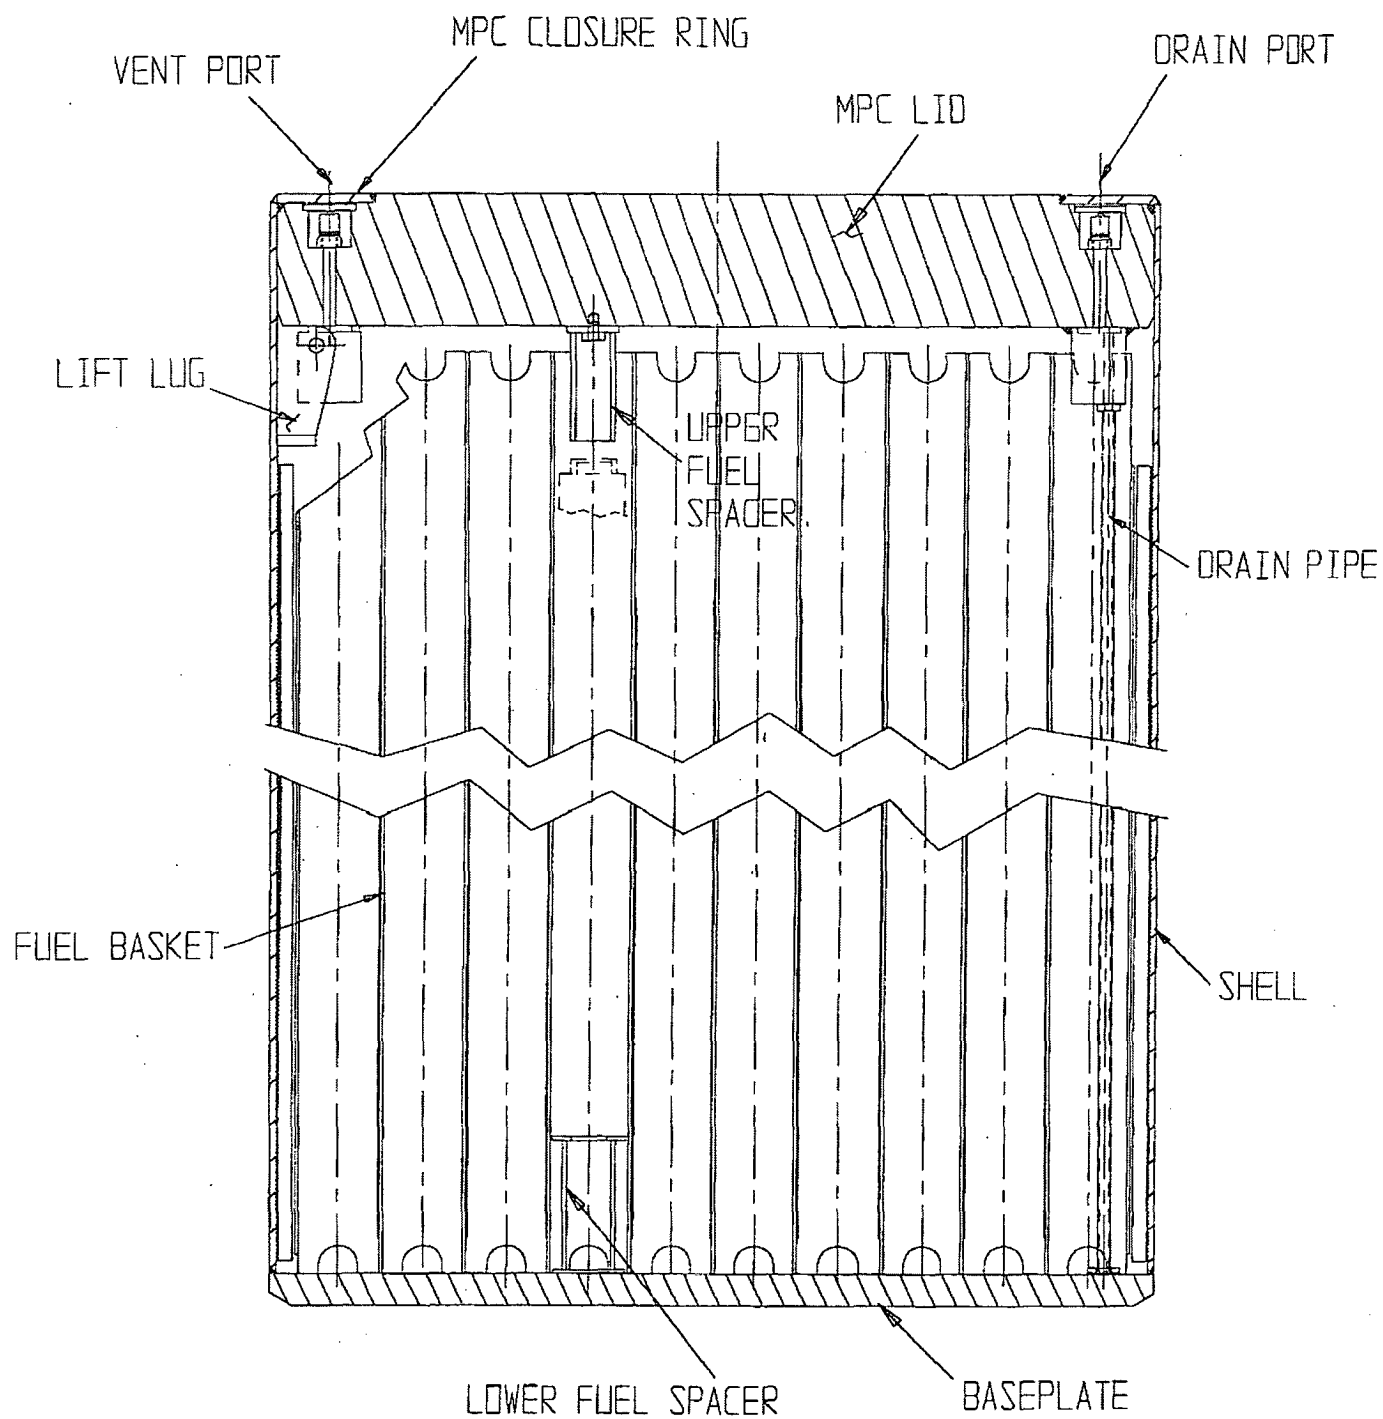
; CROSS SECTION ELEVATION VIEW OF MPC
